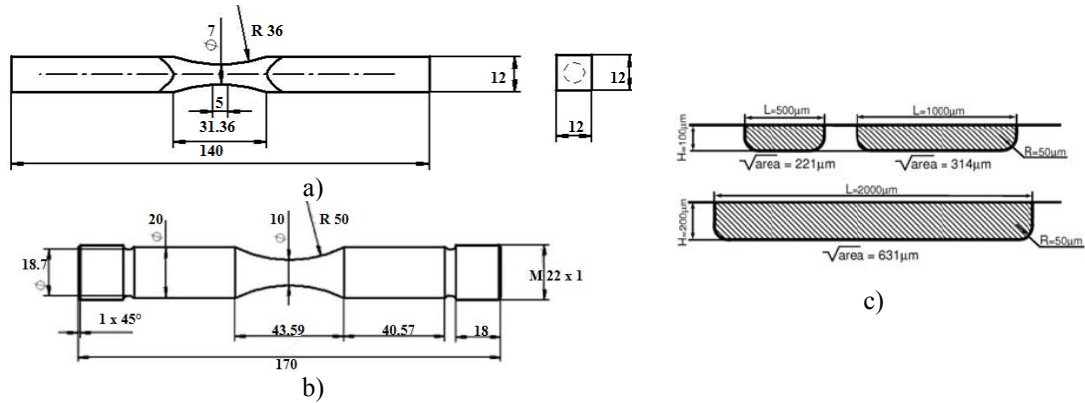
Out-of phase fatigue tests: a) gear steel specimen geometry, b) bearing steel specimen geometry, c) micro-notches used
